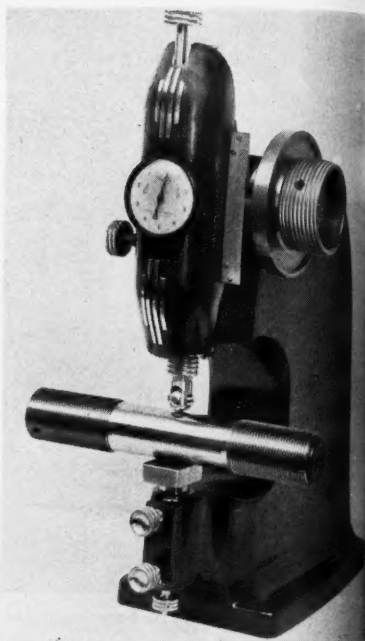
Instrument shown in Fig. 7 as used for checking plain work diameters. The spindle is serrated to prevent possible interference from dust. Spindle contact is made with ball-shaped contact.
